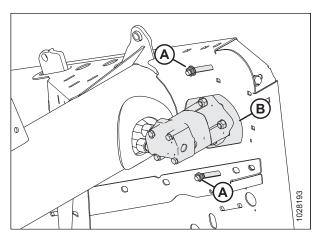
Knife Drive Motor – Double-Knife Header, View from Rear
